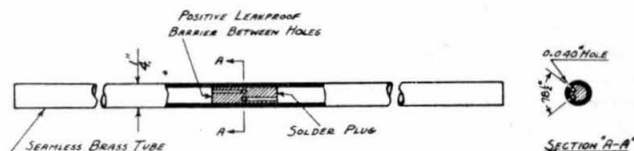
SPECIAL PITOT TUBE USED IN THE TESTS
